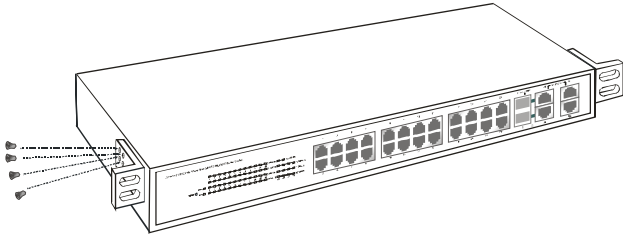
Attach the mounting bracket to the Switch with the provided screws.
